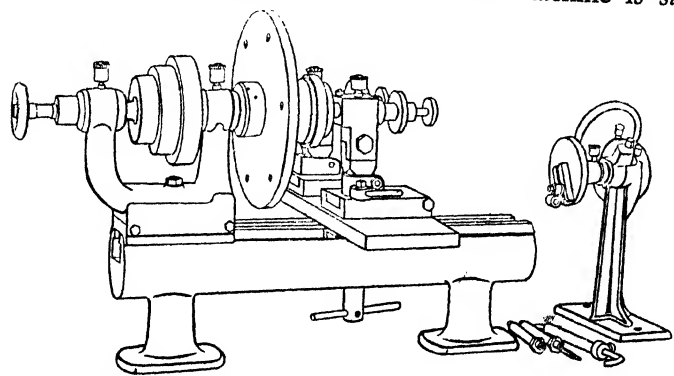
Flat grinding machine for exact thicknesses (verifying machine)
